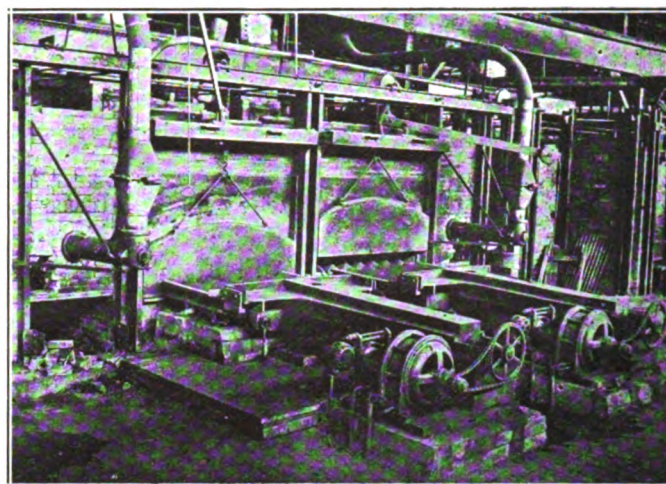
Rear view of the Hagan-Allis pair furnaces showing electric charging apparatus.
